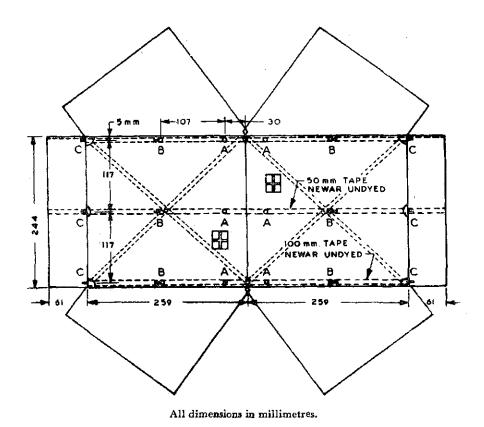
Inner Fly in Laid Out Position (Inside View)
